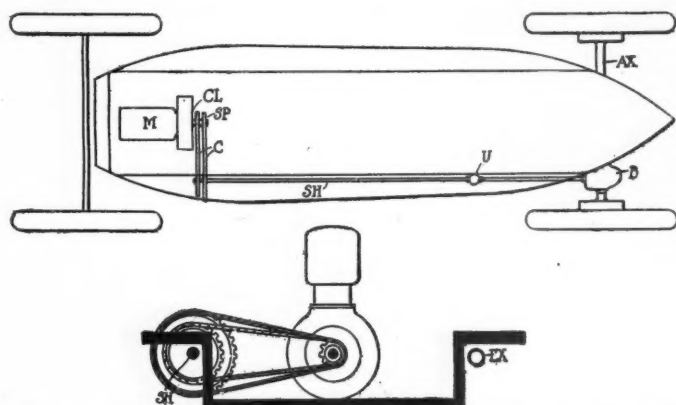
TWO-SPEED DOUBLE CHAIN DRIVE WITH SHAFT UNDER SILL AT SIDE
